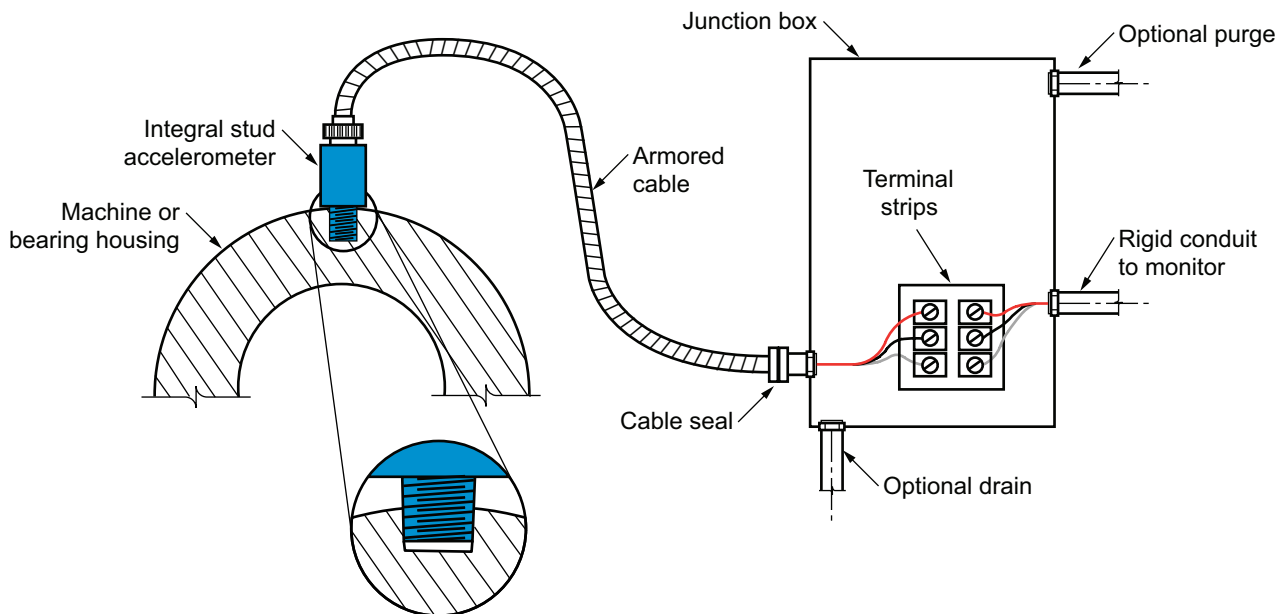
Typical Nonflush-mounted Arrangement Details for Integral Stud Accelerometer
